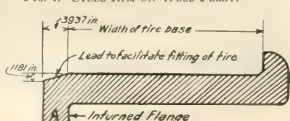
RIM OF STEEL WHEEL IN SECTION.
